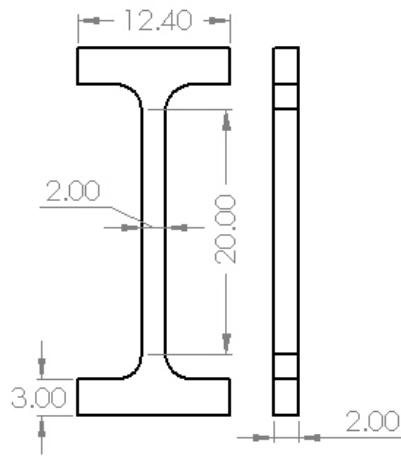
Dog-bone tensile testing sample with dimensions (in mm).
